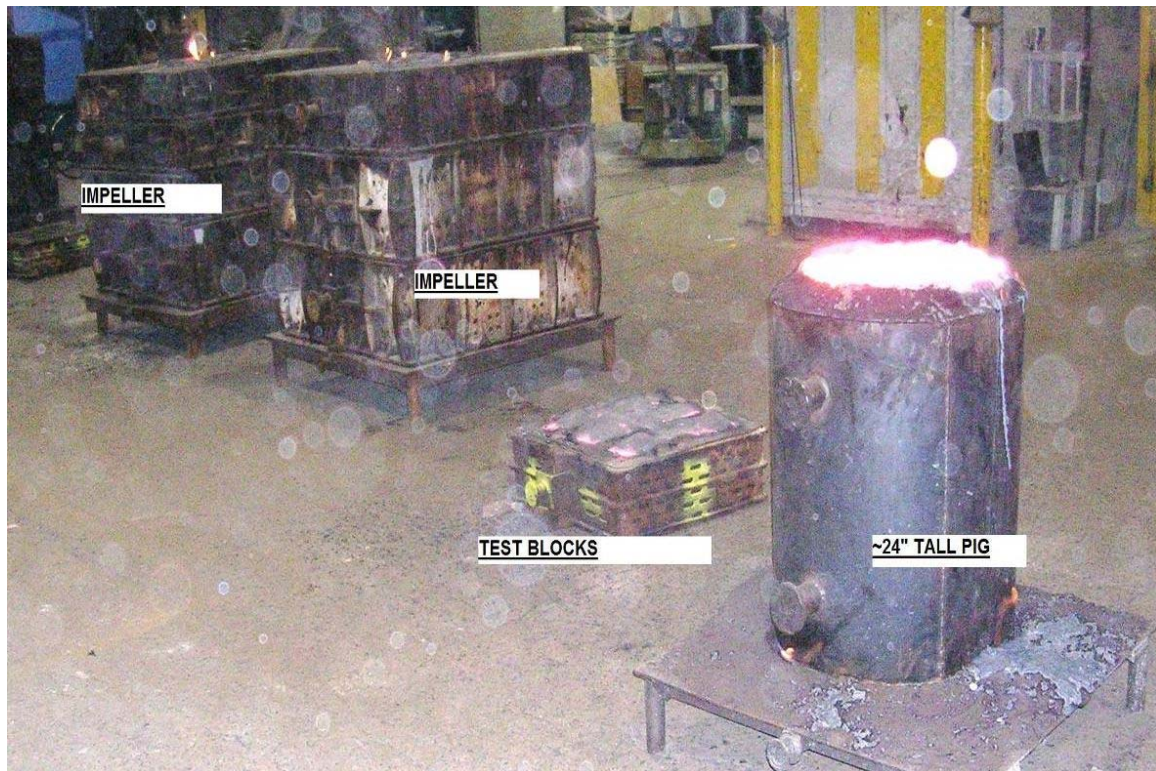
Melted 5000 lb Induction Melt Furnace tapped out with 2 1100 lb impellers, 1500 lb test block and 1600 lb pig
